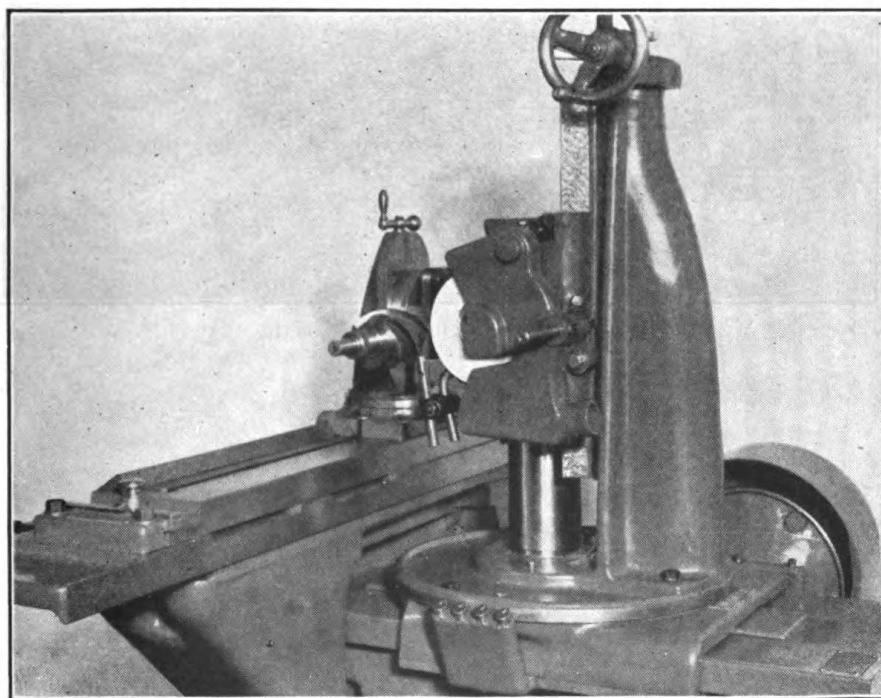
Grinding clearance angle on spiral tooth milling cutter.
